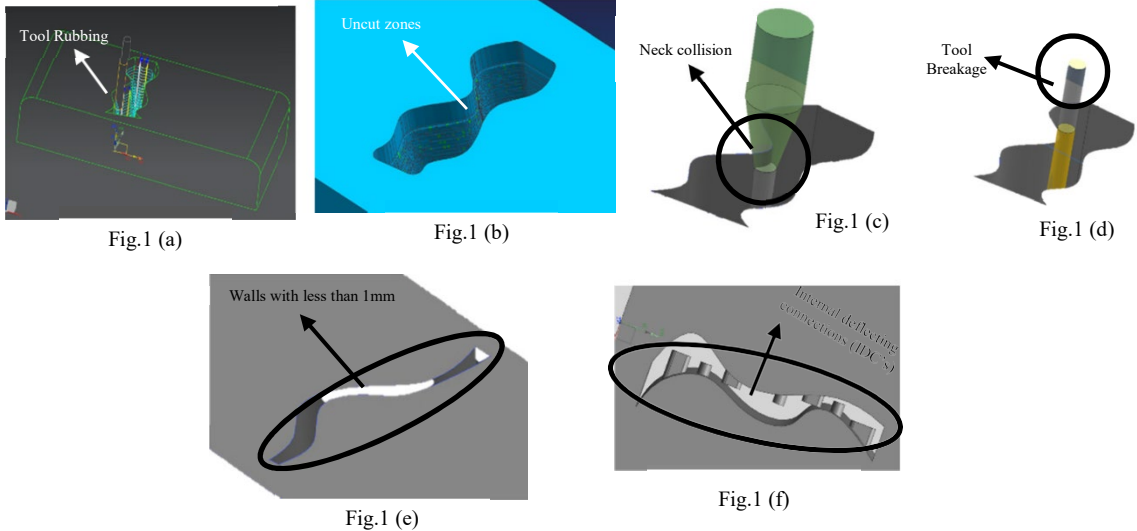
(a) rubbing of tool with the surface of the walls leading to tool / workpiece breakage/chipping; (b) uncut / overcut zones in the machining regions; (c) tool engagement or touch with the neck of the tool in the workpiece and; (d) tool breakage due to plunging like motion owing to the variation of the walls/surfaces (e) gap less than 1-1.5mm; (f) Internal deflecting connections (IDC's) between surfaces/walls
